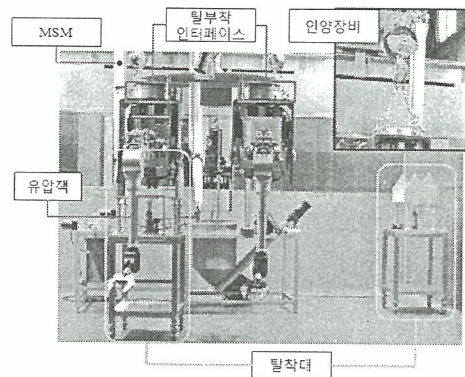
Mock-up facility and developed tools for the manipulator disassembly.
